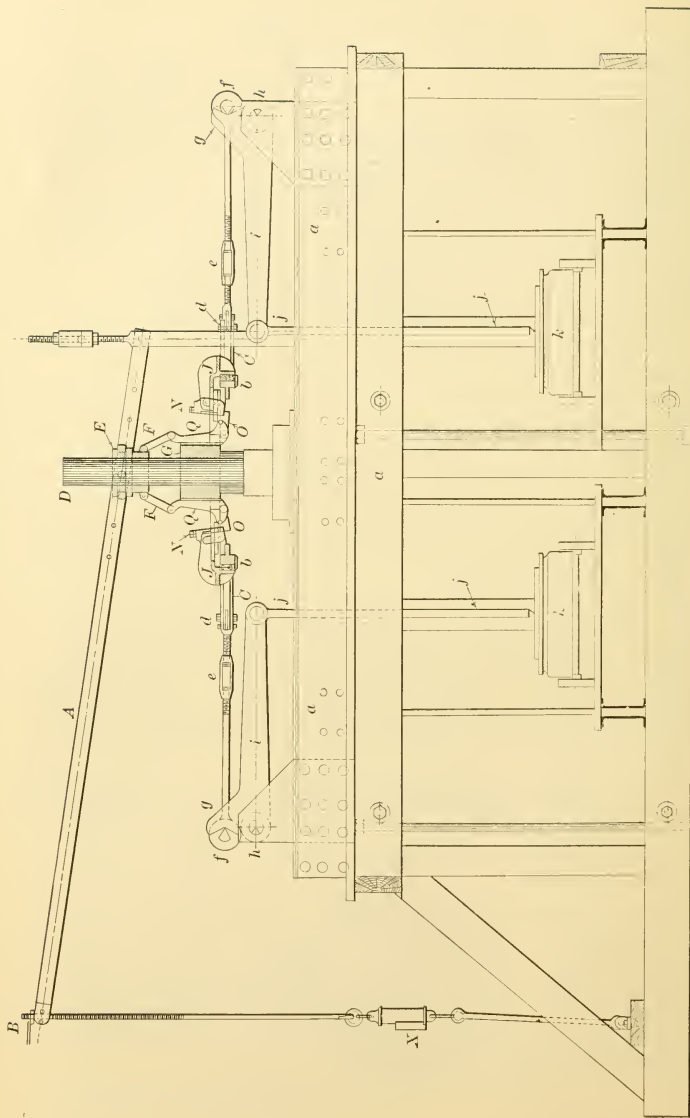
STATIC CLUTCH-TESTING APPARATUS
